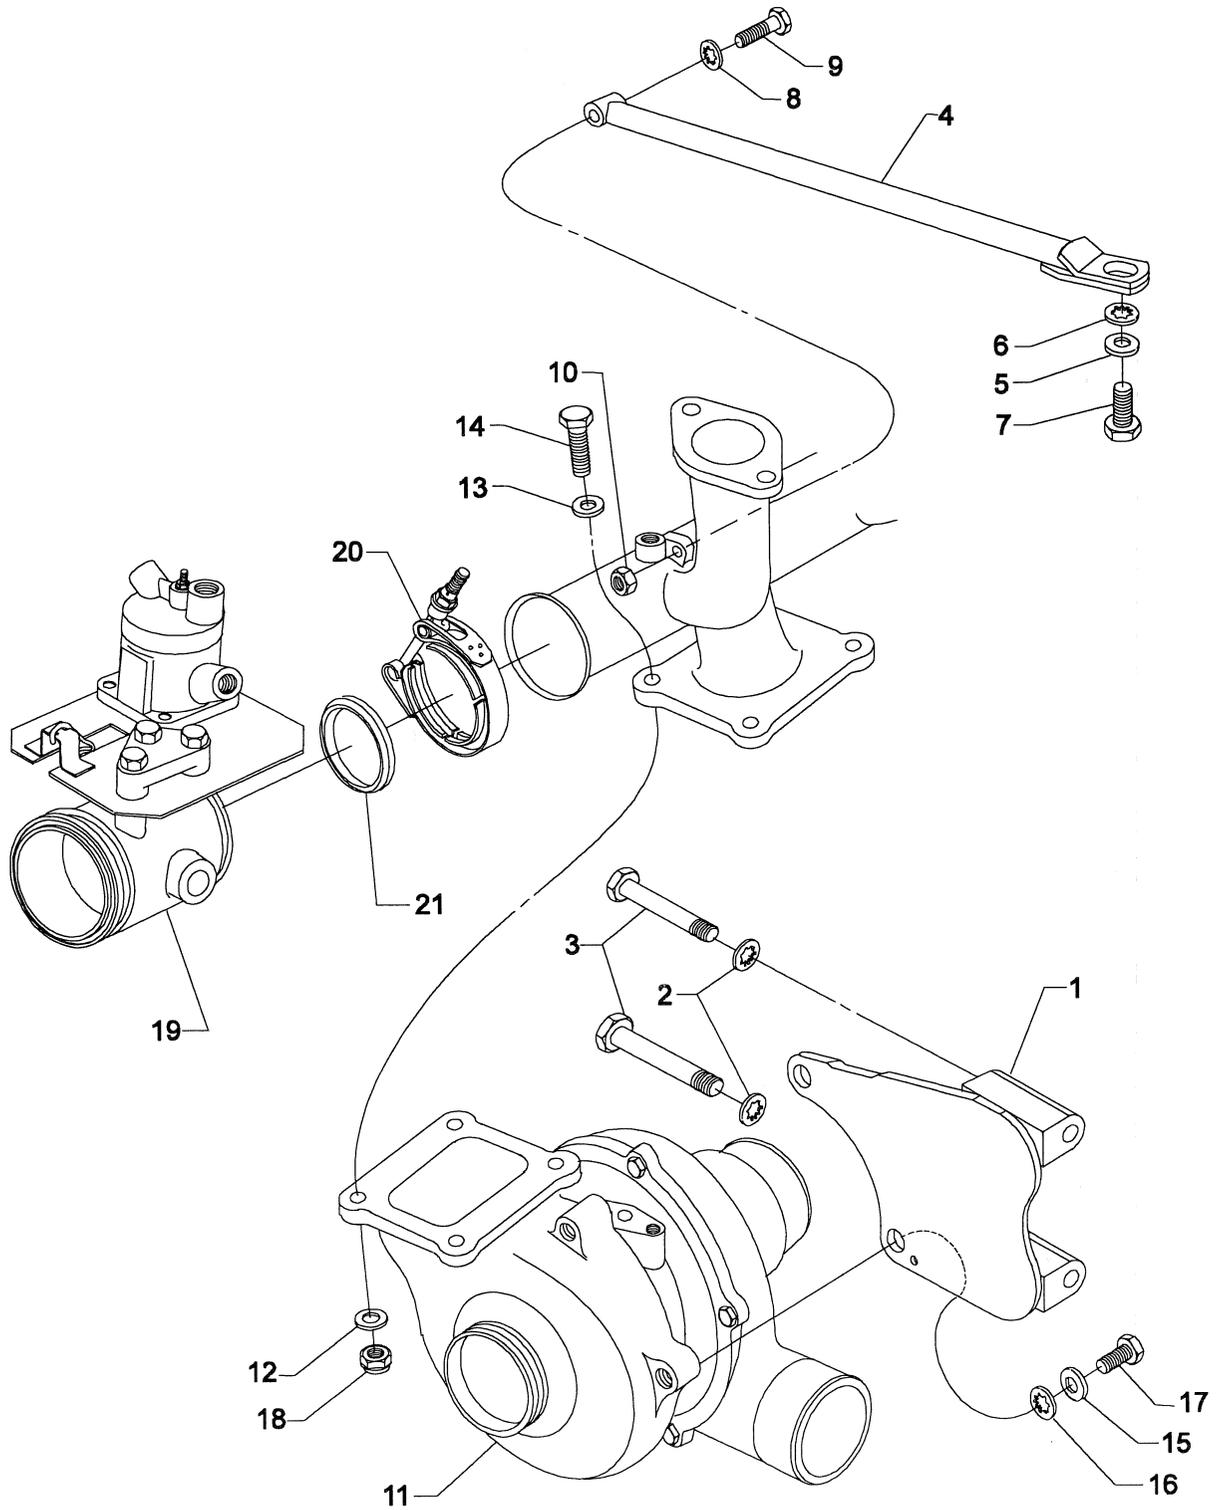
TURBOCHARGER, SUPPORT AND ATTACHING PARTS
